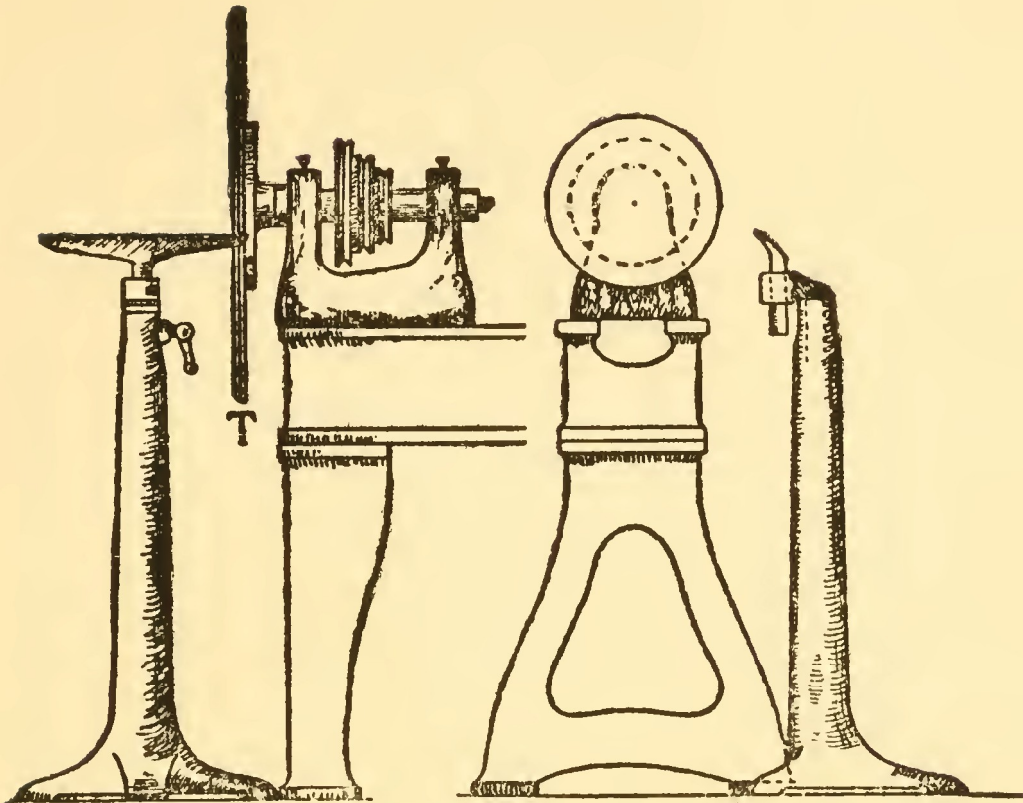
LATHE WITH HEADSTOCK REVERSED, SIDE VIEW ; ALSO END VIEW, SHOWING THE REST.
